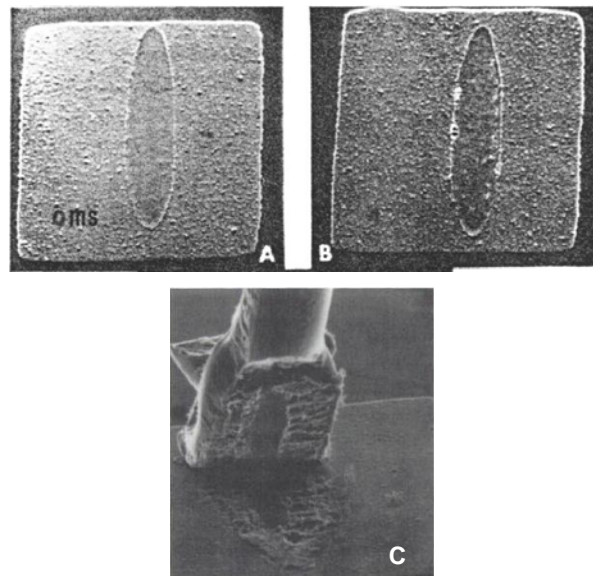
a,b.) Pattern of typical bonding area after wedge bond lift-off. c) the center of the bonding wire has weak contact the pad and stays unwelded. Follow [3]
